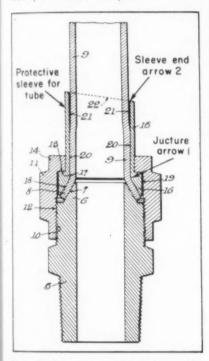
Patent for this tube fitting points out defects of prior fittings.
